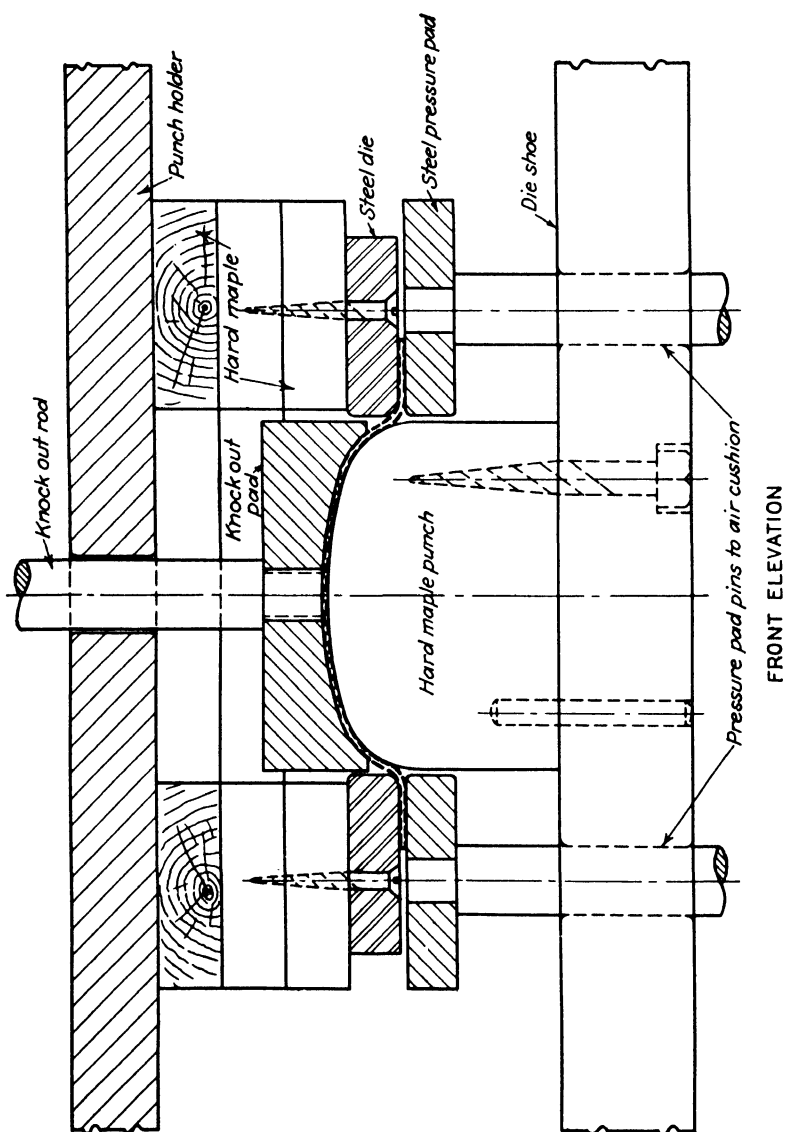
Conventional design of a low-priced drawing die, largely of hardwood construction, for producing the shell sketched in Fig. 179.
